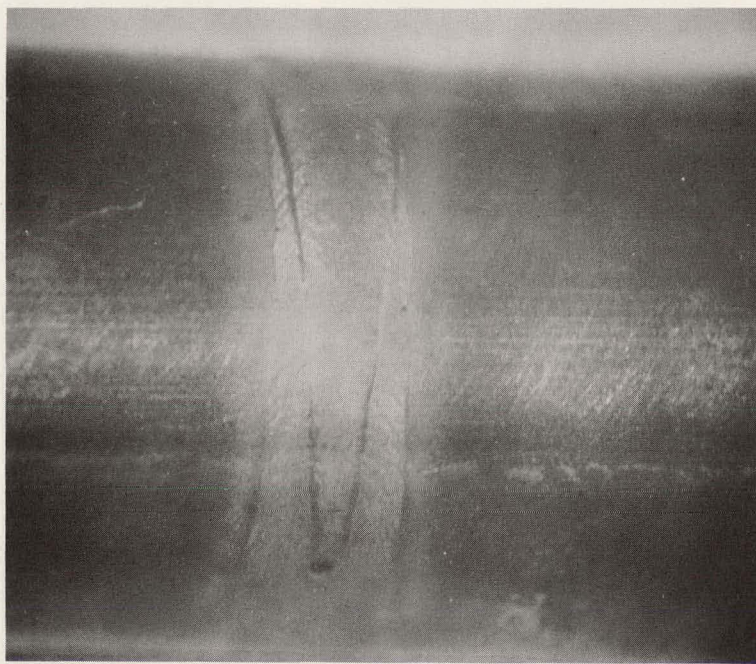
External Appearance of Weld Made with Optimum Preheat-Decay. Note Smooth Runout.
